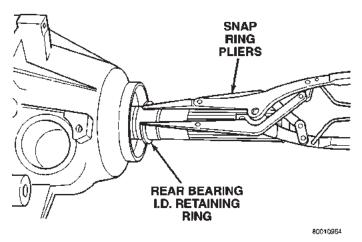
Output Shaft Rear Bearing Retaining Ring
